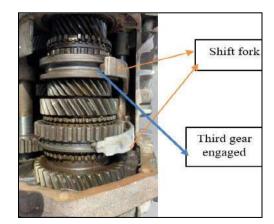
This is a diagram of how the third gear is getting engaged from the lever.
